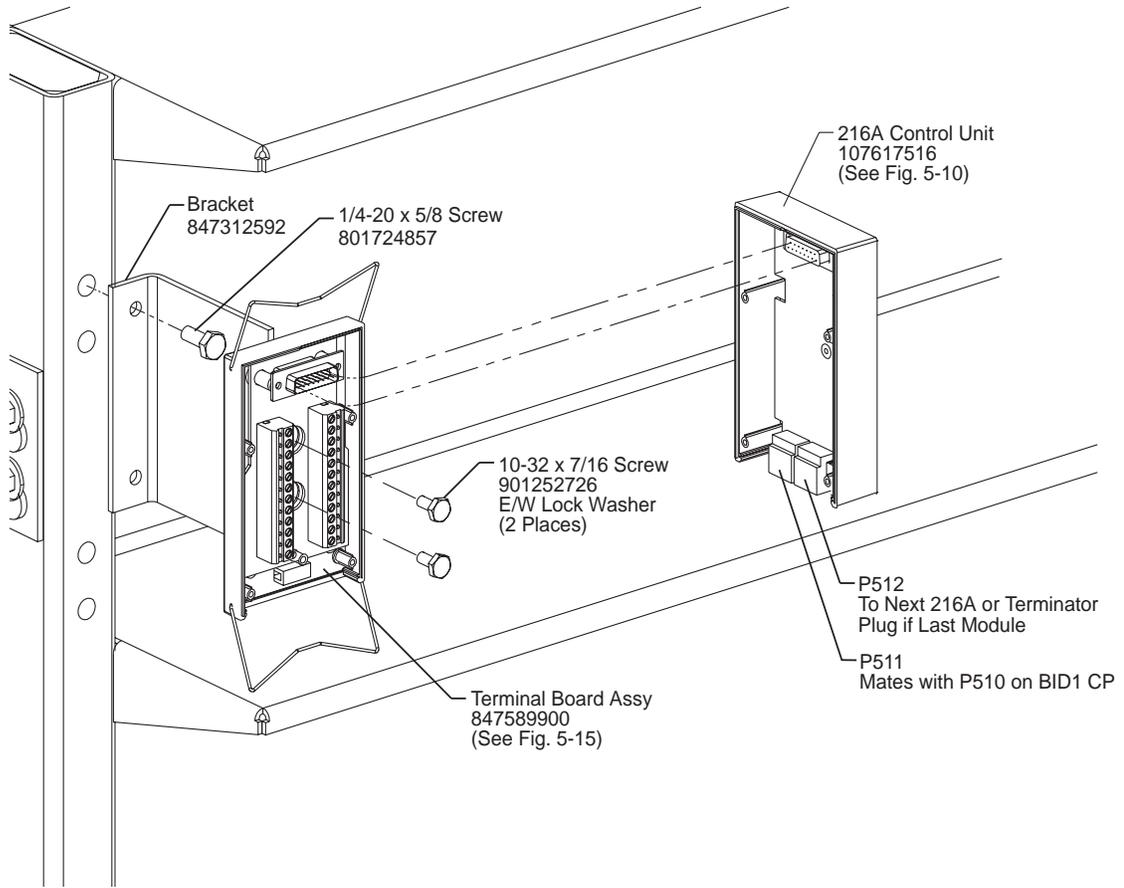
216A Control Unit and Terminal Block Base Assembly
